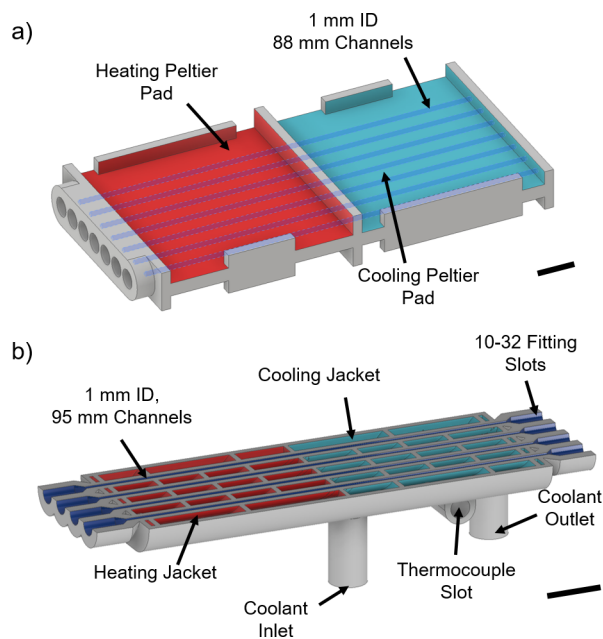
CAD images of the two devices: (a) Direct contact (DC) device with two Peltier element pads for heating and cooling, (b) cross-sectional cutaway of the heating/cooling jacket (HCJ) device with two recirculating zones, jacket and thermocouple fittings. The scale bars in (a) and (b) represent 10 mm.
